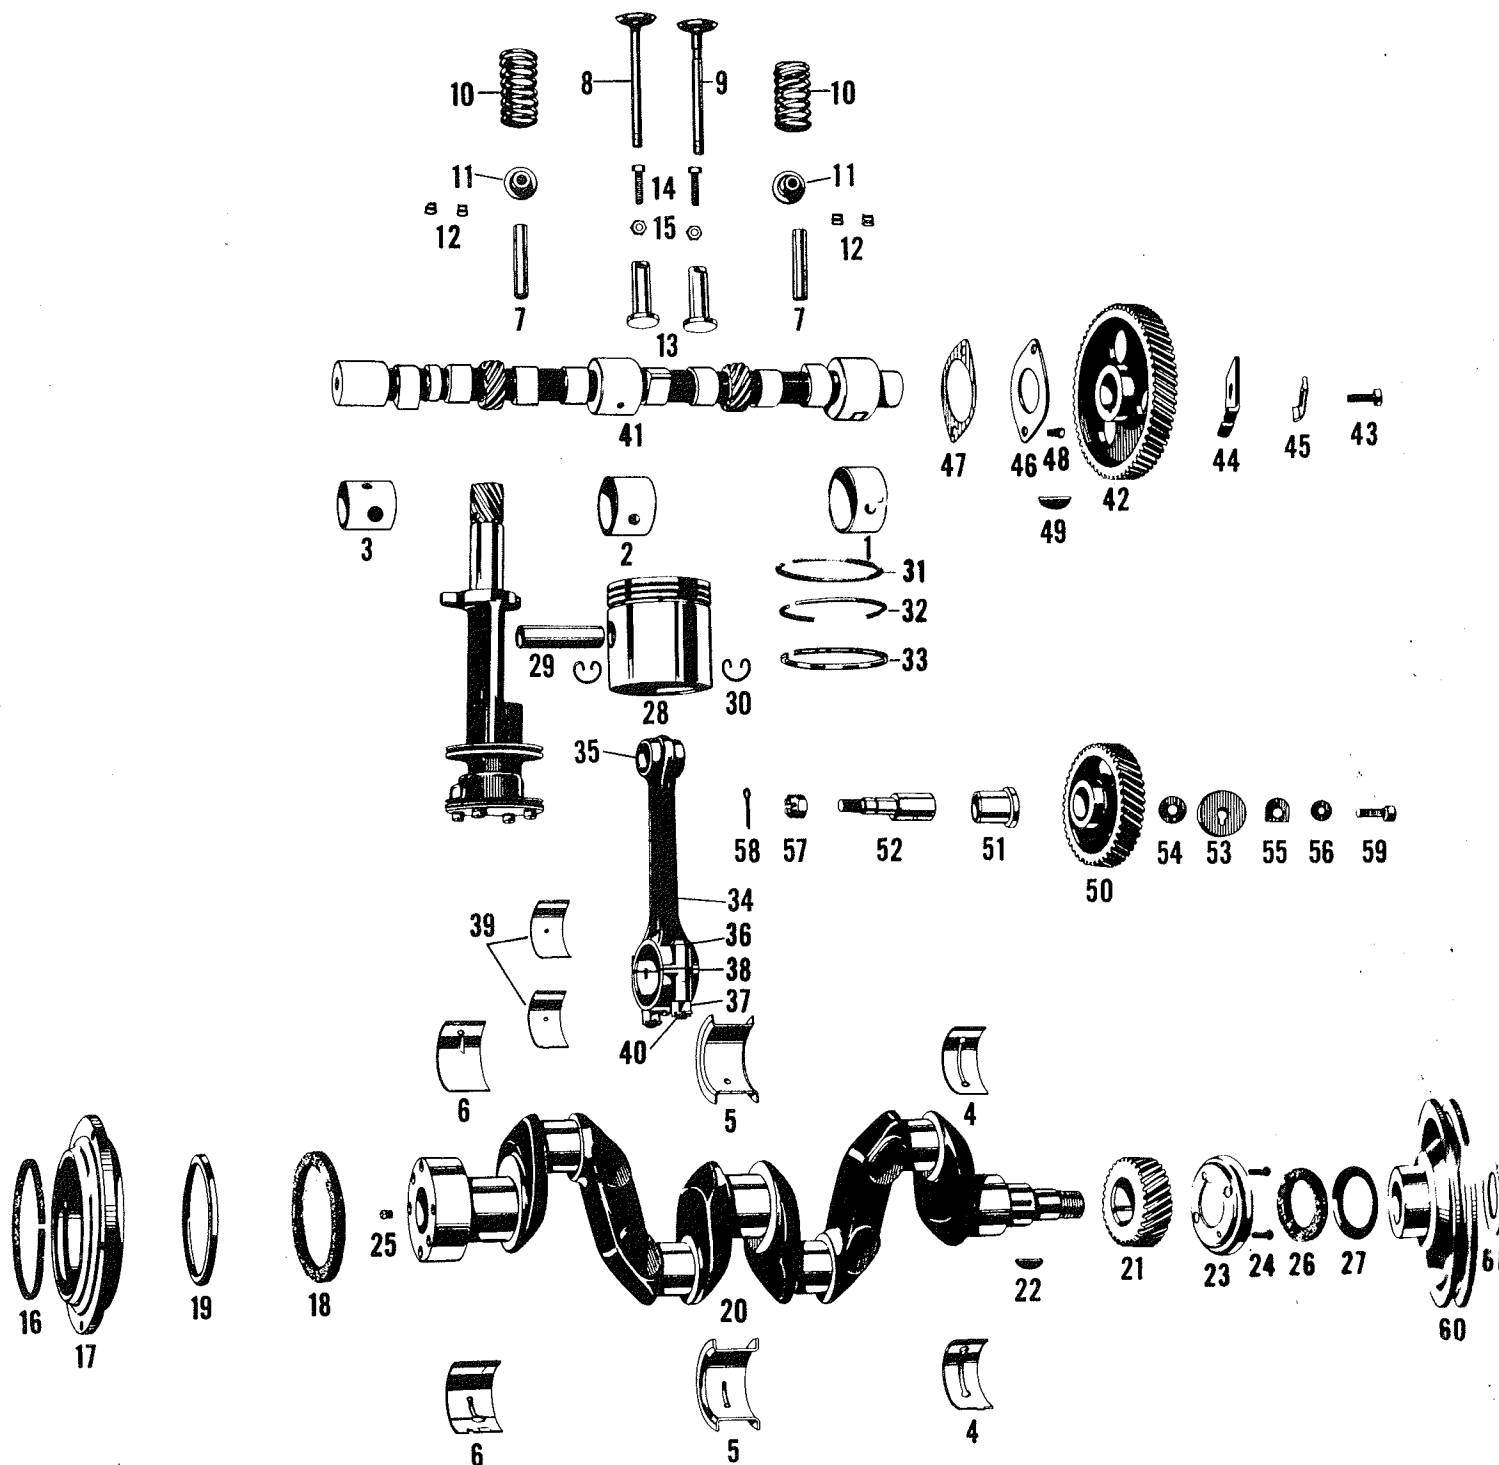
CRANKSHAFT, CAMSHAFT, VALVES, PISTONS AND GEARS
